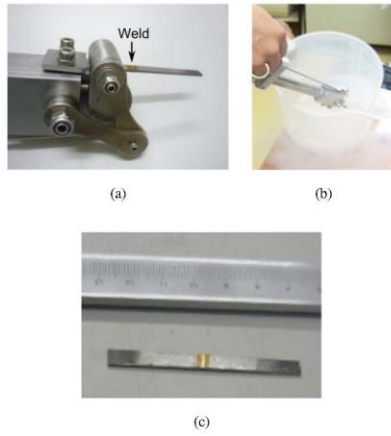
Bending and free-recover method used to analyze the SME: (a) Initial shape of the sample positioned in the bending device; (b) dipping in liquid nitrogen and bending; (c) final shape after heating up to room temperature.
